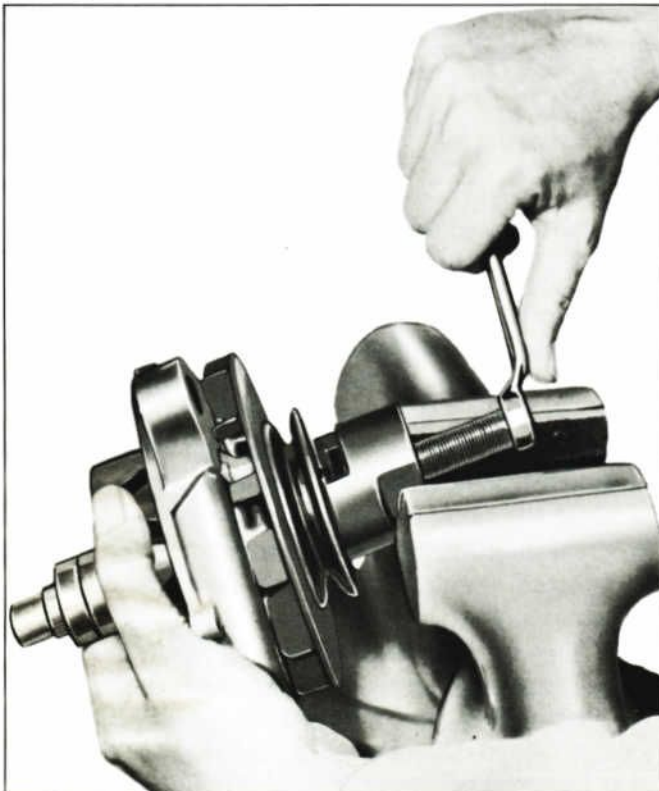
REMOVING TERMINAL SPACER AND BRUSH HOLDER ASSEMBLY
